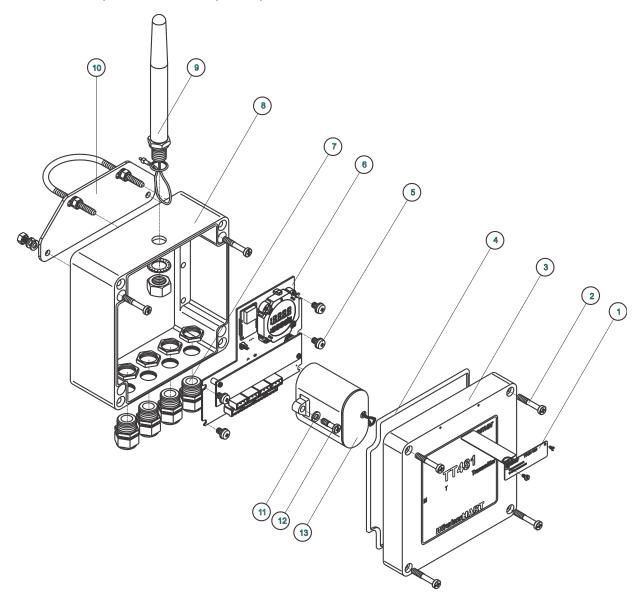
(a) – Exploded View - TT481 WirelessHART<sup>TM</sup> with 4 Channels
